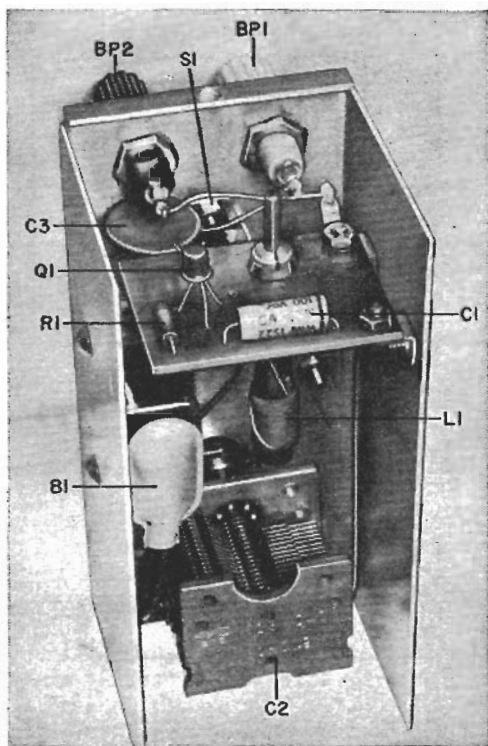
Mount battery to side of box with length of aluminum stock, $\frac{1}{2}$ " spacers, and #6 hardware.
